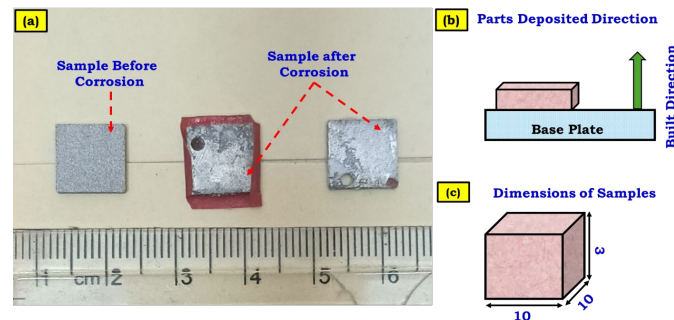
(a) Samples before and after corrosion (b) Parts deposited direction (c) Sample dimensions
